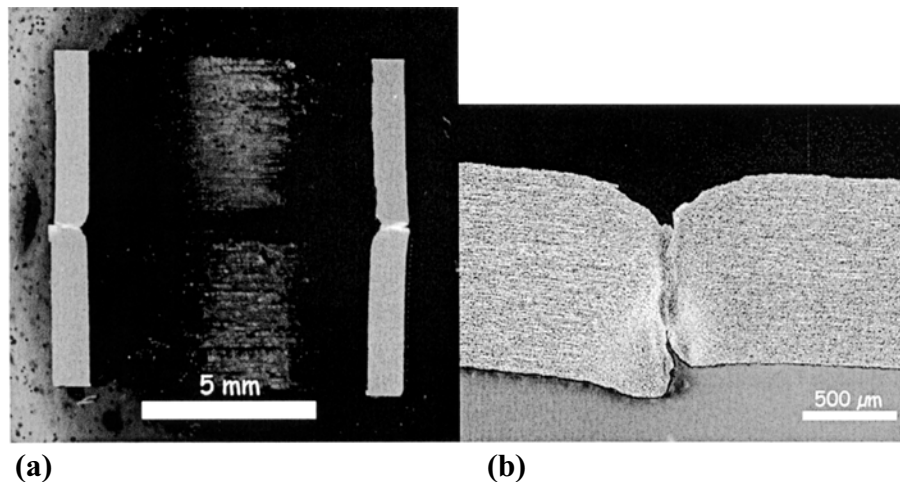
Cross section of a torsional forge weld showing (a) macro-view of joined tube; and (b) view of a welded surface (etched³¹).
